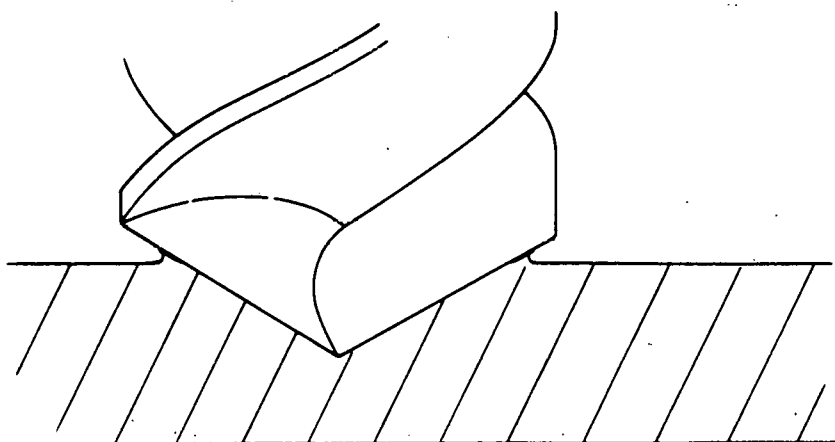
Small Bulge Formed on Top Workpiece Surface by Drill Lips
